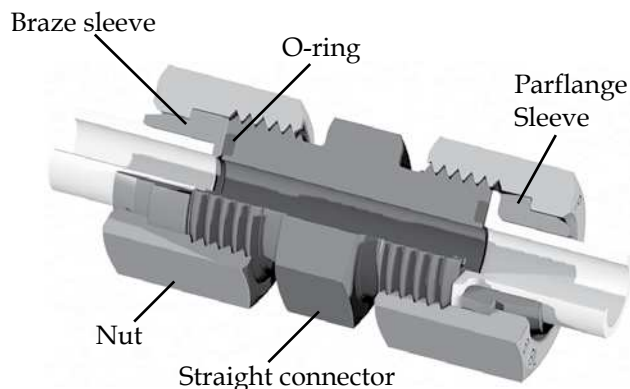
Sleeve attachment with flanged and brazed assemblies. Adapted from: Assembly/Installation section of [64].
